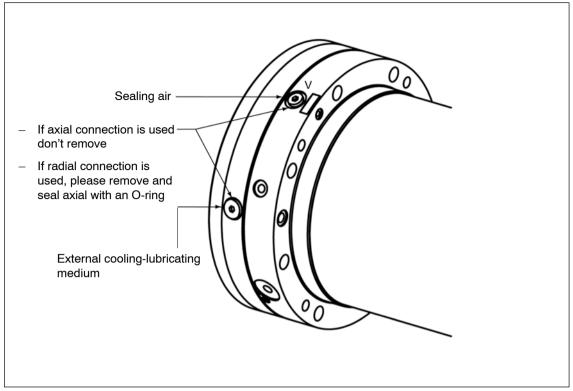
ECS-M 2SP120 optional external cooling-lubricating medium
